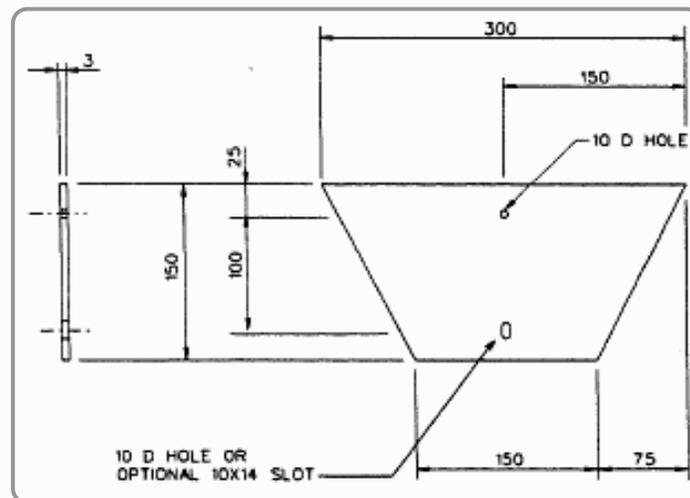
Trapezoidal soil plate PLS02 recommended by AASHTO (distance in mm)
